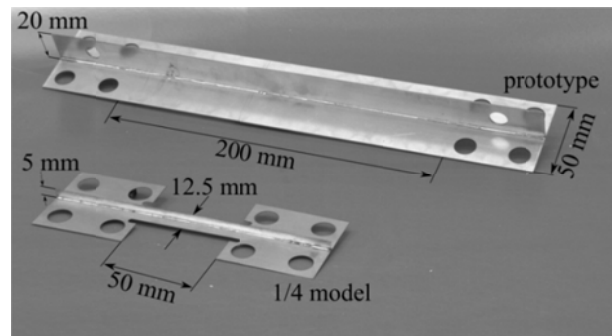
Dimensions of the specimens employed in the impact tests. Prototype made of 1.00 mm thick sheet, and model of 0.25 mm thick sheet.
